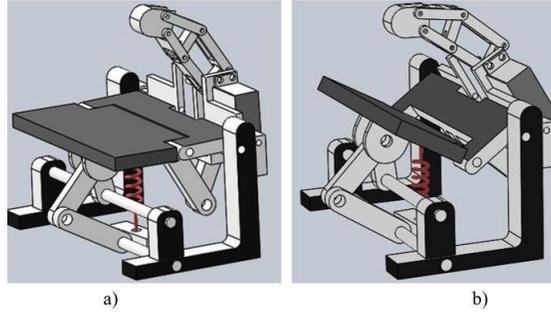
CAD design of robot hand in Fig. 8; a) with open palm, b) with closed palm
